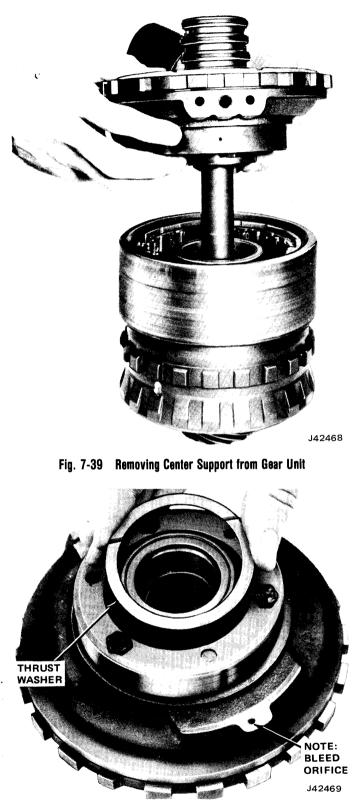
Removing—Installing Center Support Thrust Washer
